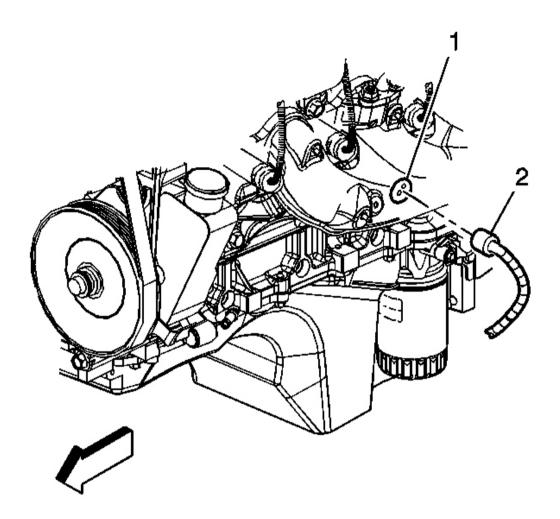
Engine Coolant Heater Cord Electrical Connector & Coolant Heater Courtesy of GENERAL MOTORS CORP.
